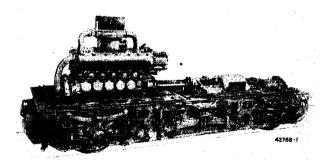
Frame of a Diesel engine coach of the German State Railways, driven by a Maybach six-cylinder four-stroke engine.
